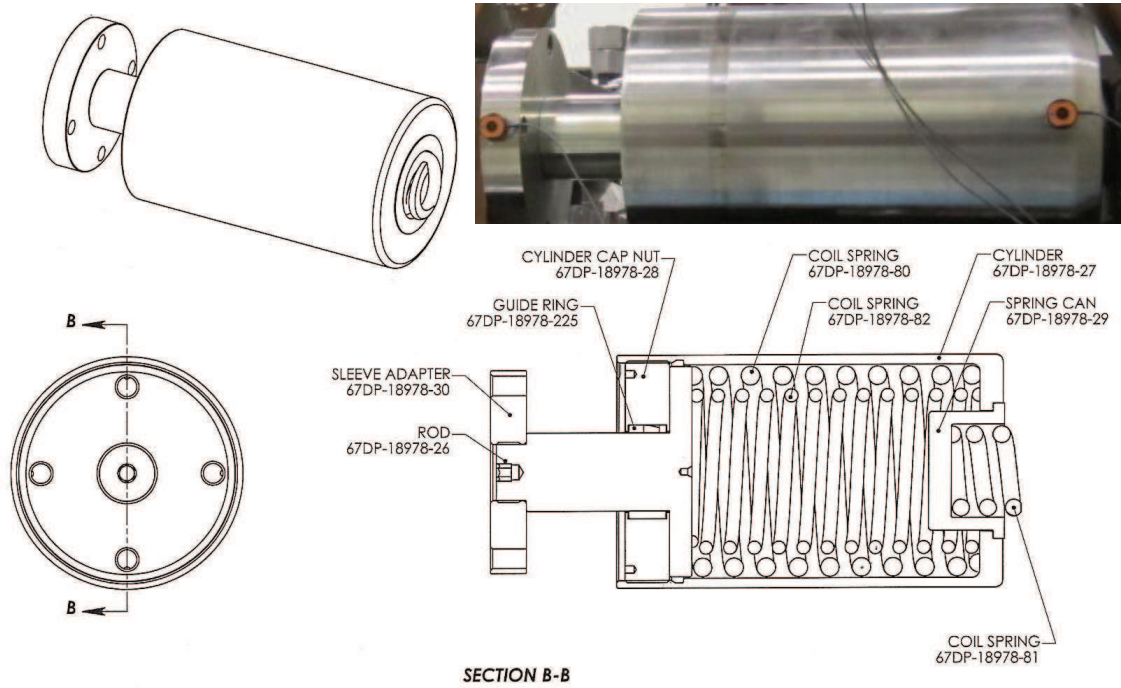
Fabrication drawings of GSA showing the coil-springs. Inset: Photograph of GSA
